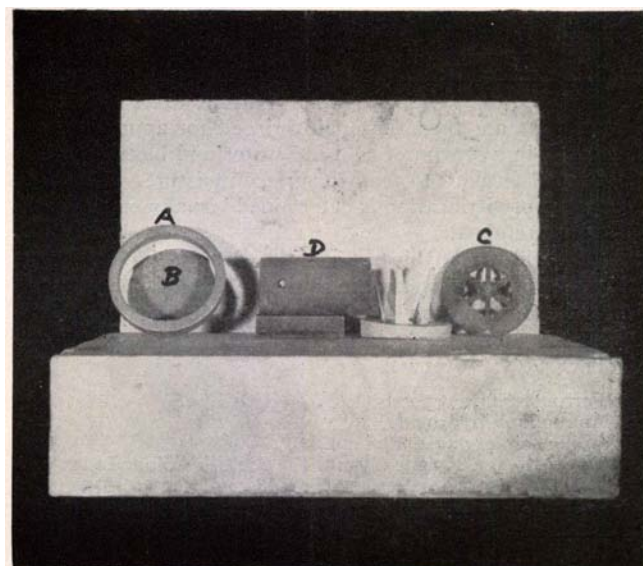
Tools used to set up cone plaques for the furnace. (A) ring mold for forming plaque; (B) metal disk used to push plaque from mold; (C) guide for setting cones in plaque; (D) gauge for setting cones at proper angle of  $82^\circ$  with horizontal.
